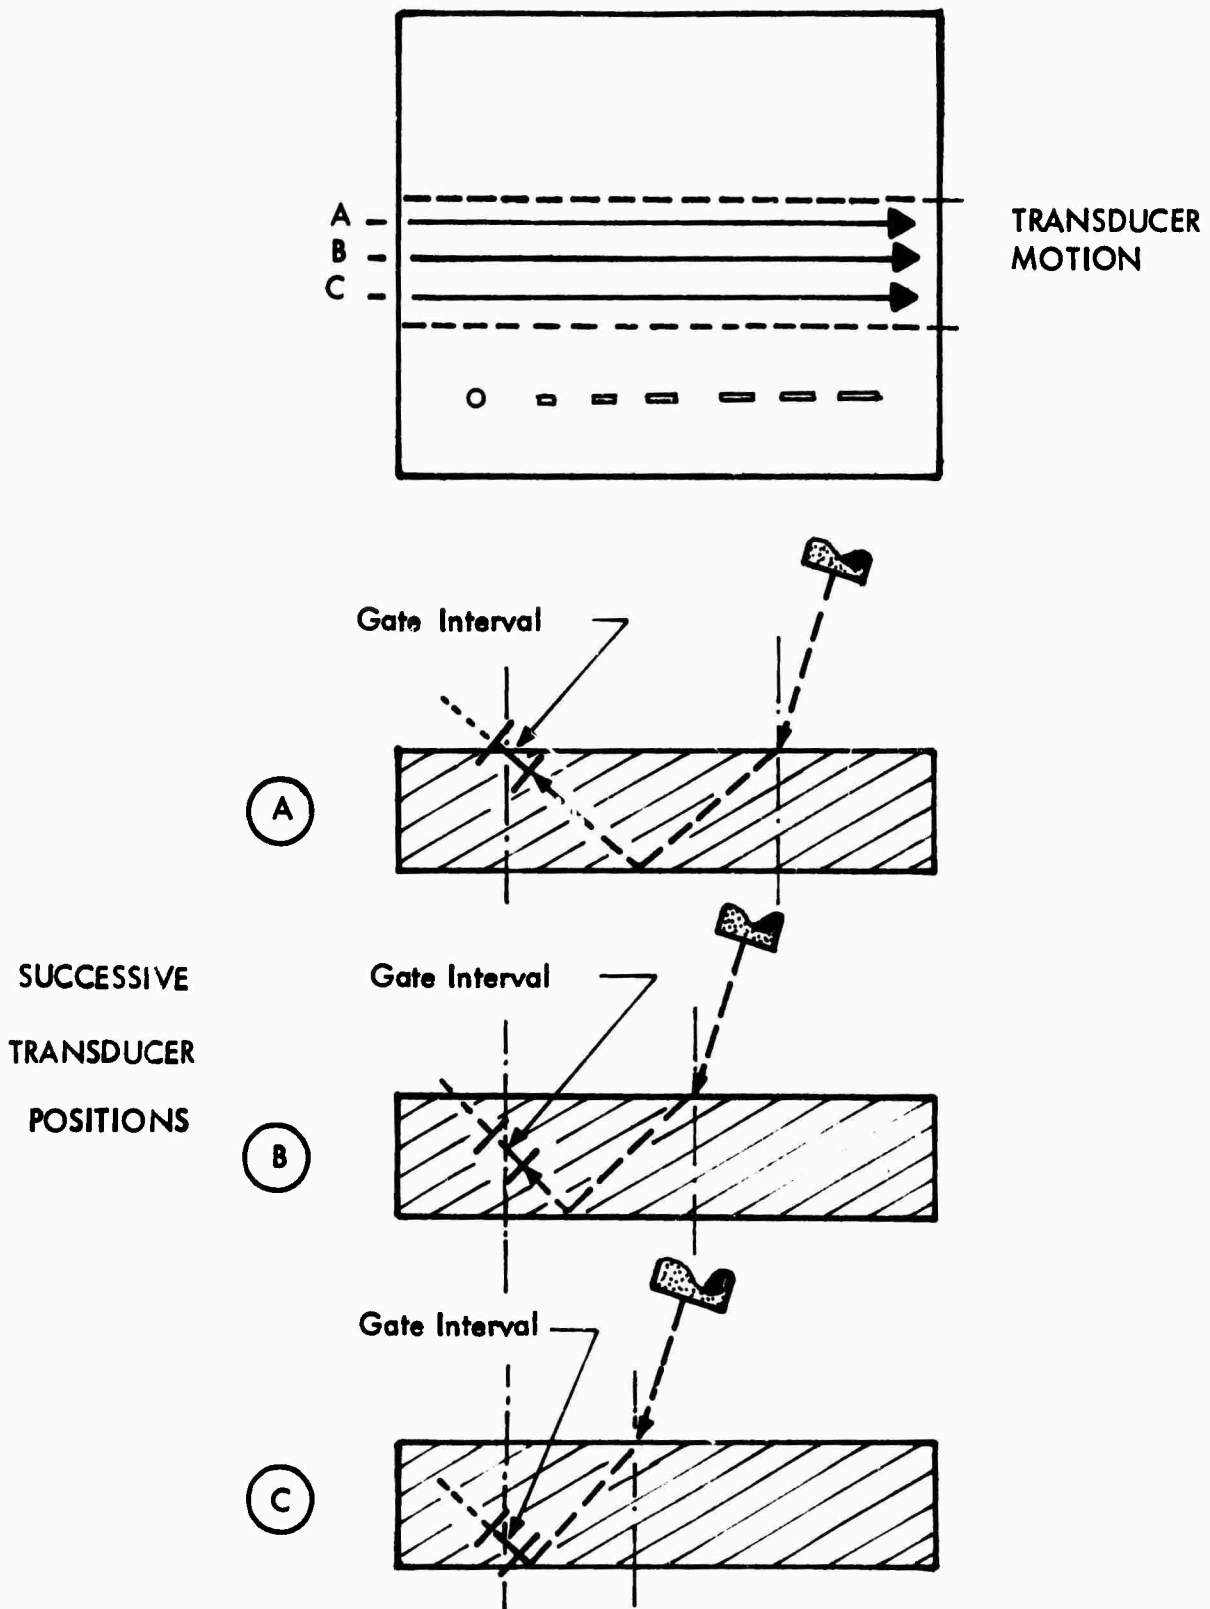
NARROW MOVING GATE WELD INSPECTION PROCEDURE
